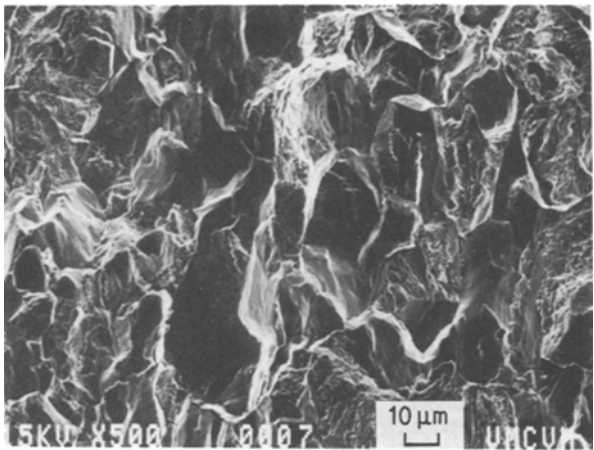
Intergranular fracture in the regions adjacent to the weld.
